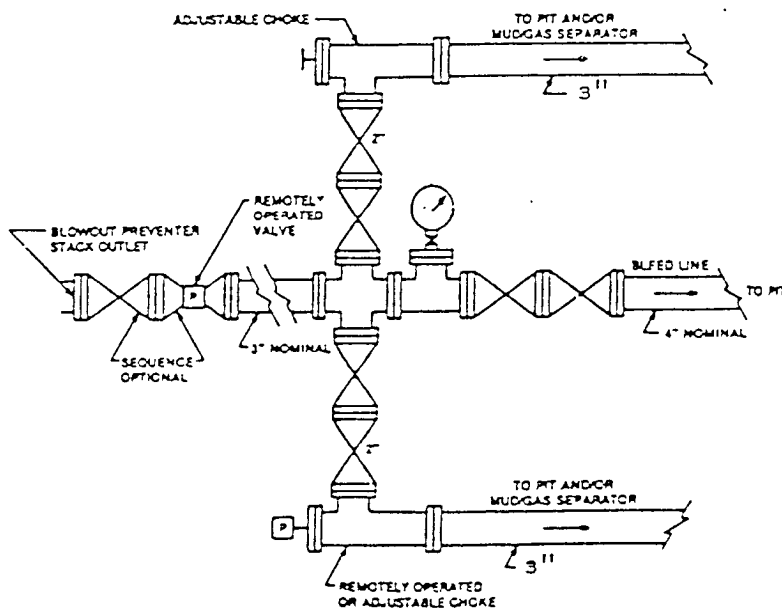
Typical choke manifold assembly for 5M rated pressure service — surface installation.
